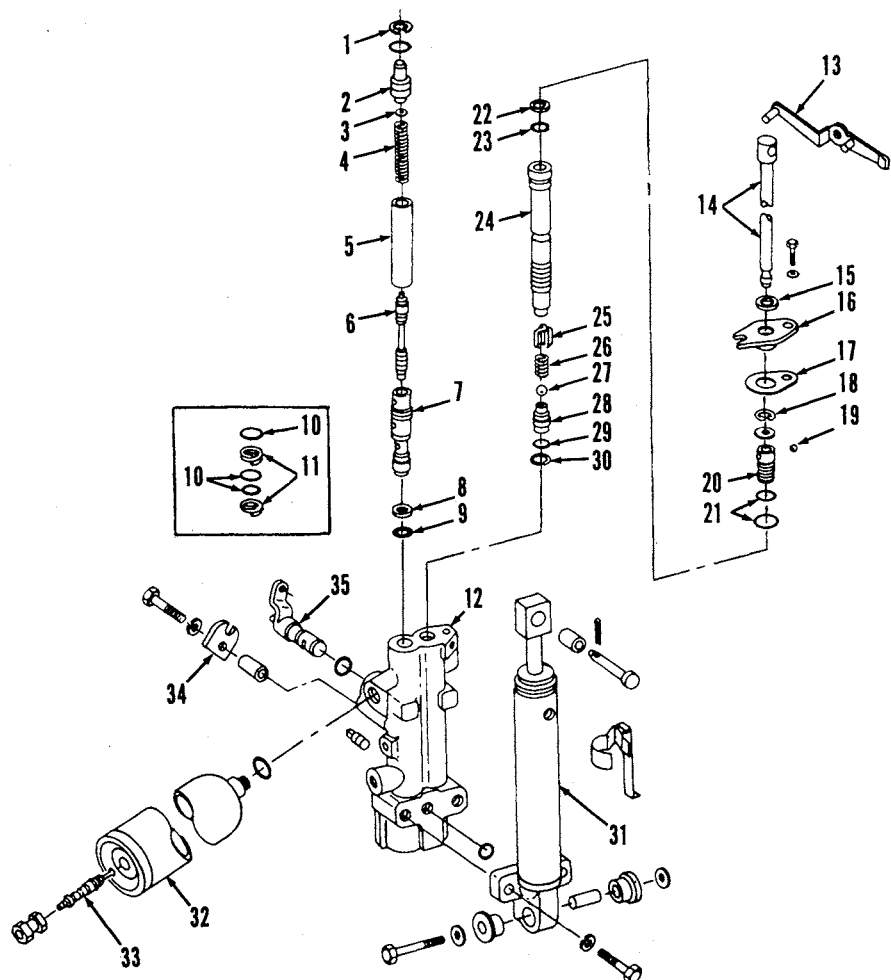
Exploded view of Hydracushioned seat control valve assembly.
